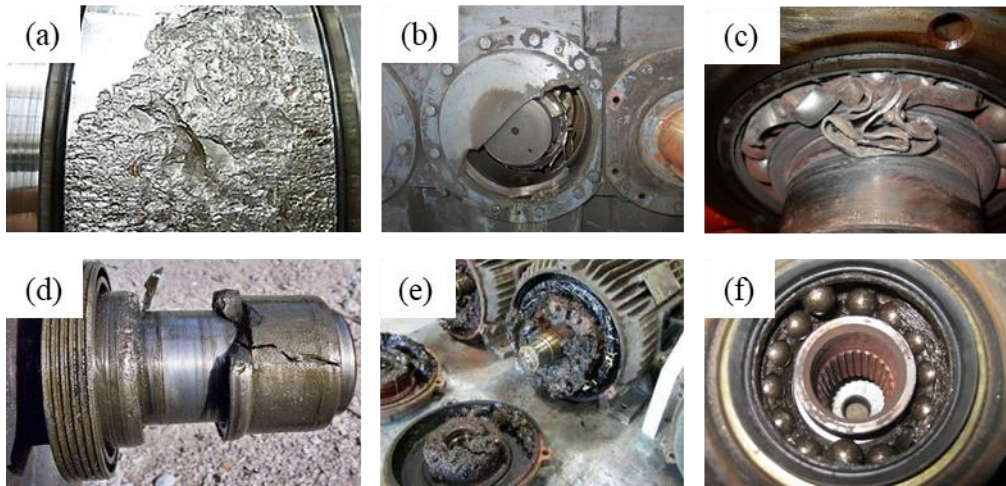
Bearing failure cases from industrial machines: (a) wind turbine; (b) gearbox; (c) pump; (d) train bogie; (e) motor; (f) automobile
